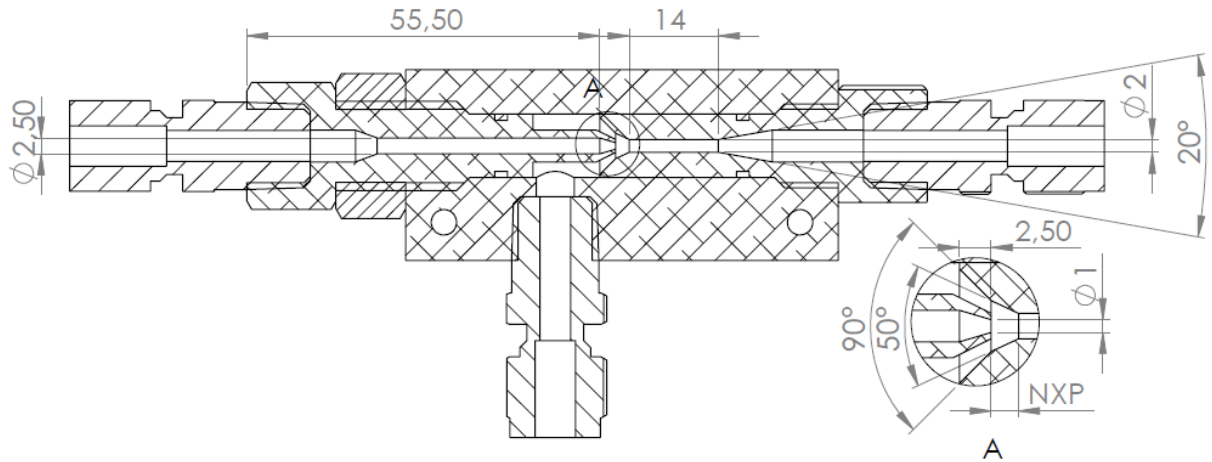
8- Sectional view of the initial ejector with some of its dimensions.
